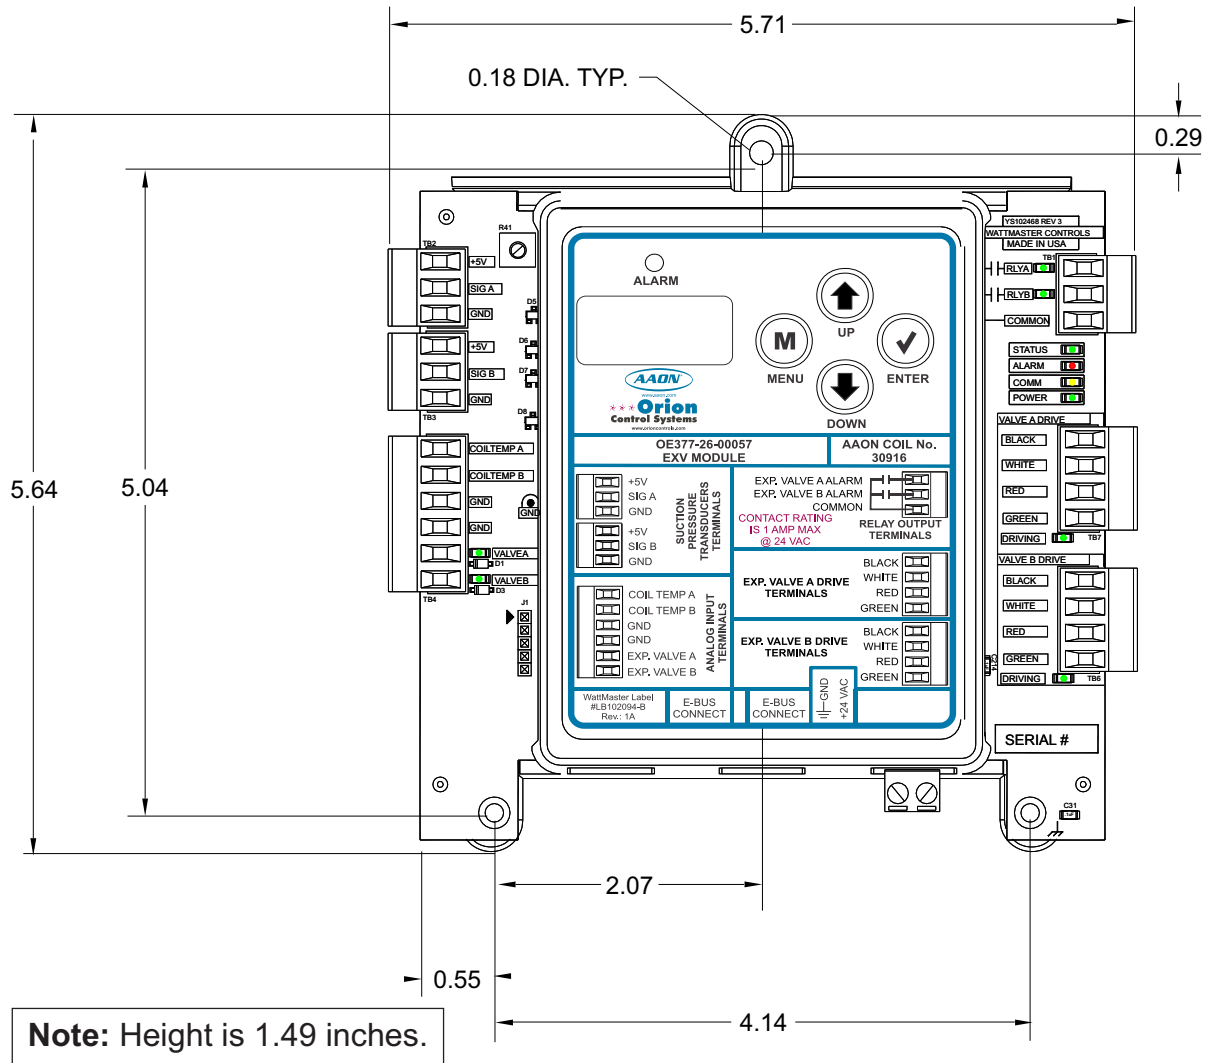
OE377-26-00057 Dual Electronic Expansion Valve Module Dimensions
